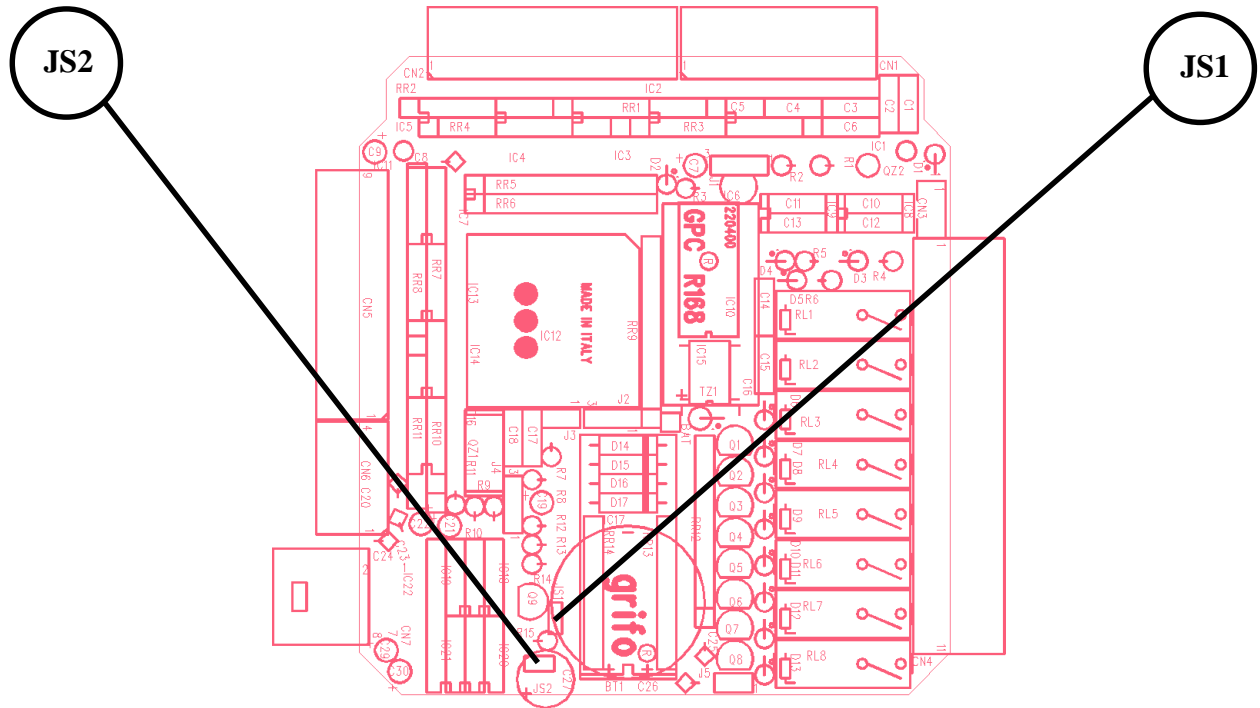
GPC® R168 JUMPERS LOCATION ON SOLDER SIDE
